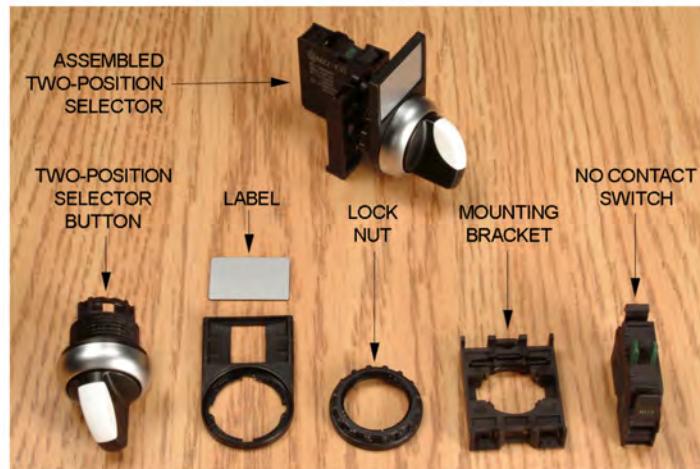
Components required to assemble a typical two-position (Forward/Reverse) selector, and an assembled selector.
